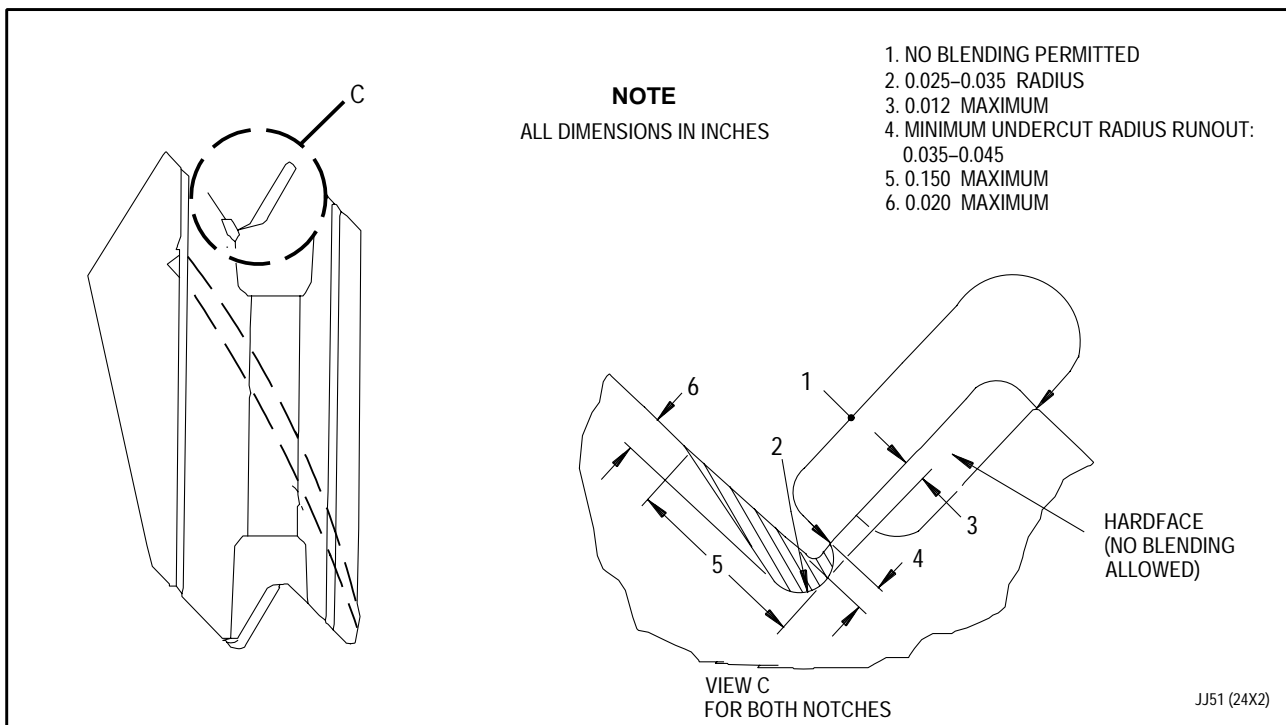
Third Stage Turbine Rotor Blades - Shroud Notch Blending
